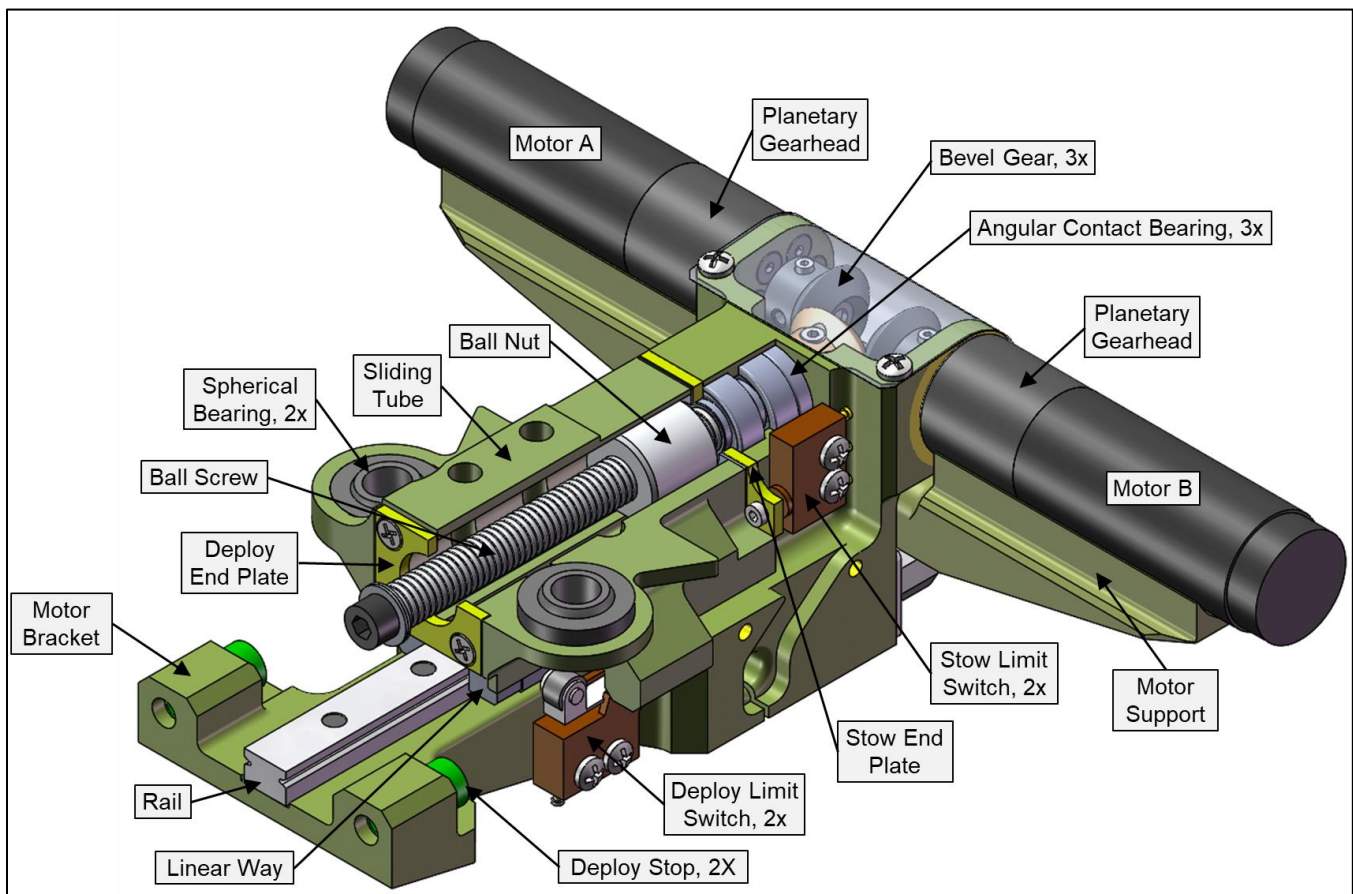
Motor Bracket Assembly shown in the stowed state (some parts sectioned for clarity)
